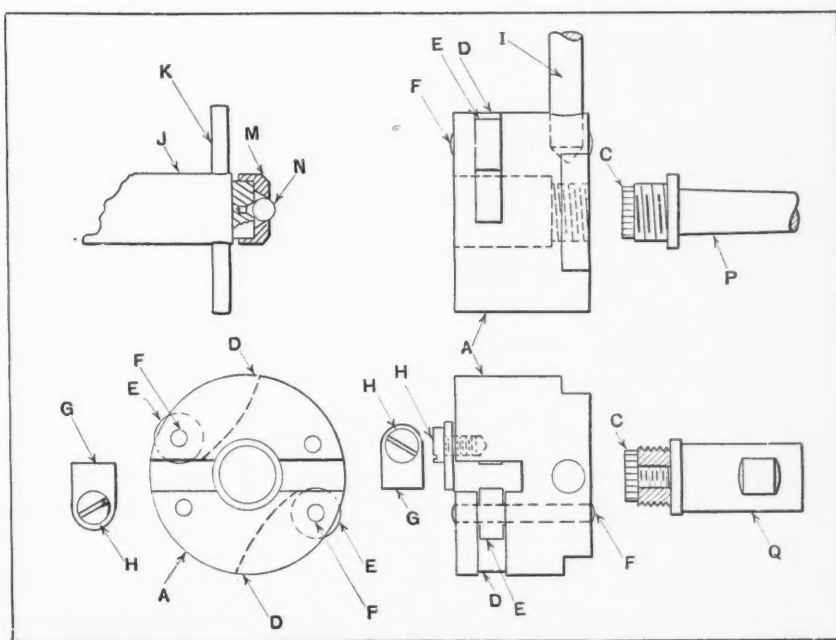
Details of Quick-change Chuck Shown at F in Fig. 1
